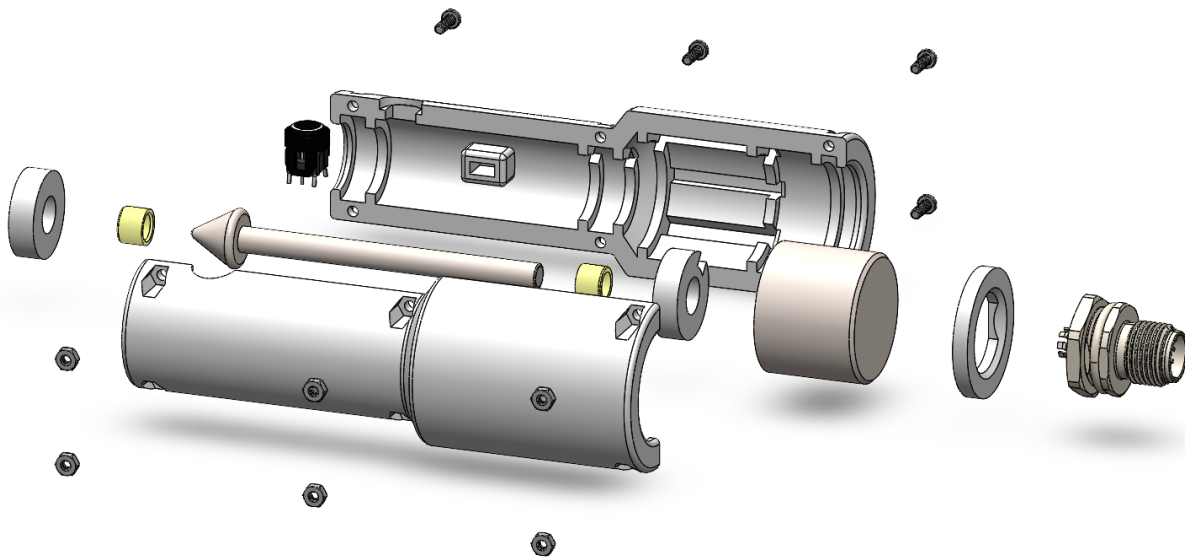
Dimetric exploded view of 10 g handpiece assembly. Motion limiter and wire reliefs exposed
